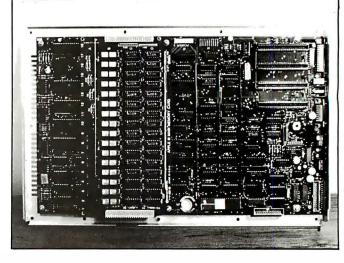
The Apple III main PC board. The piggy-back-mounted board to the left of center is the removable main memory board. Using this board, the Apple II can be expanded to its full memory capacity without using up any of its I/O expansion slots.
